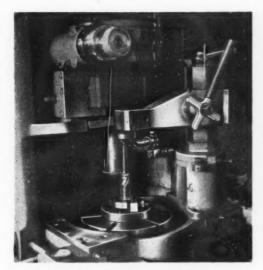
Set-up on a Sykes V10A Gear Genertinga Machine for Cutting Serrations on the Crankshaft
